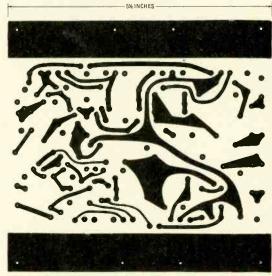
PATTERN for the foil on the bottom surface of the amplifier board.
